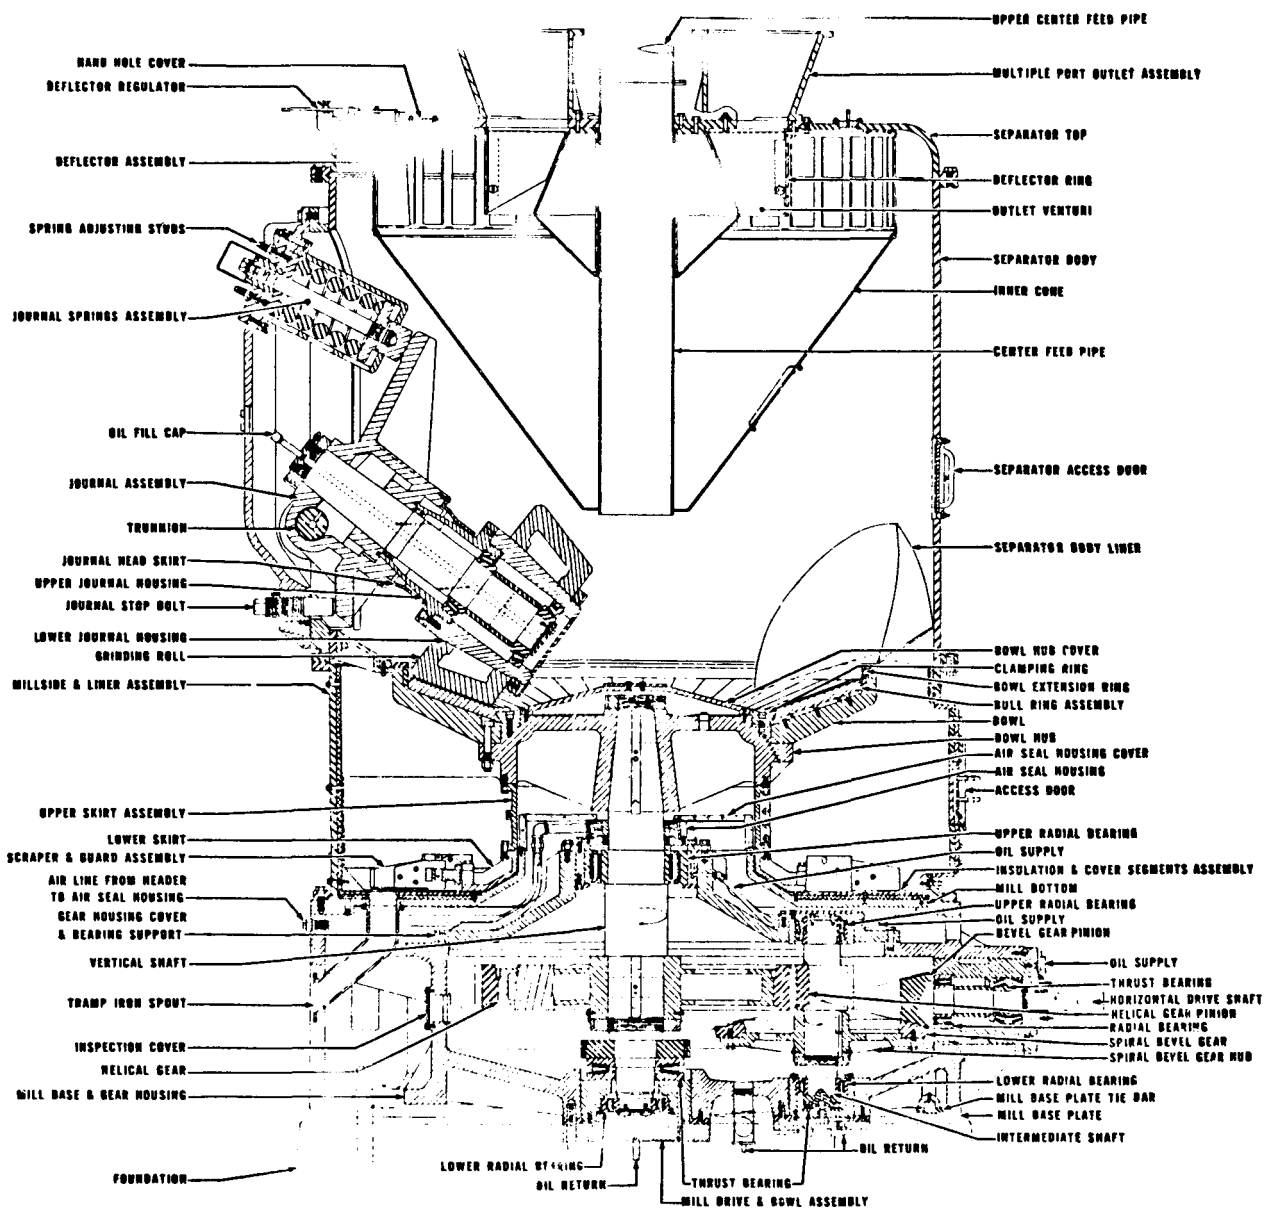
Pressurized Bowl Mill (Part Location Drawing).
